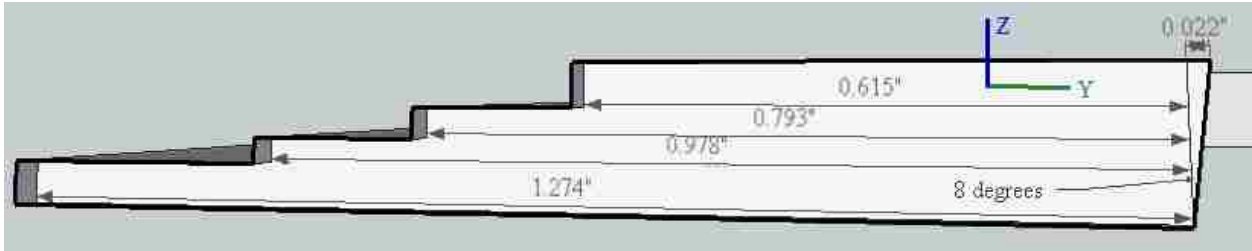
Cross sectional view of the 20x20 cm² upper trimmer lead plate in the in-plane dimension illustrating the lateral dimensions of the plate.
